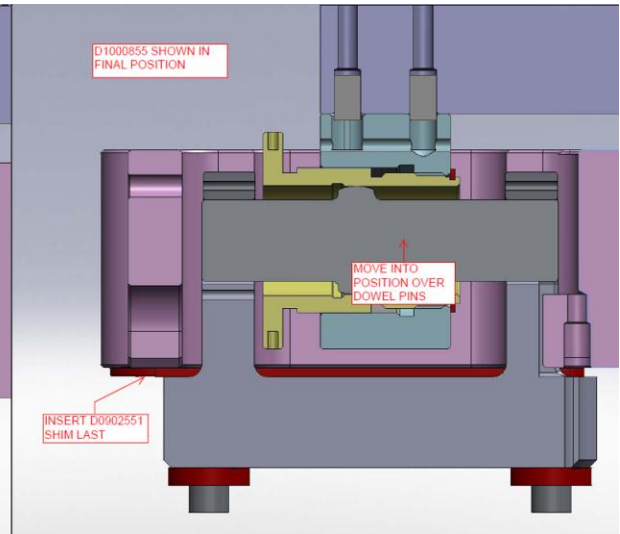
Cross Section of D1000855 Stage 1-2 Locker Assembly Installation 2/2
